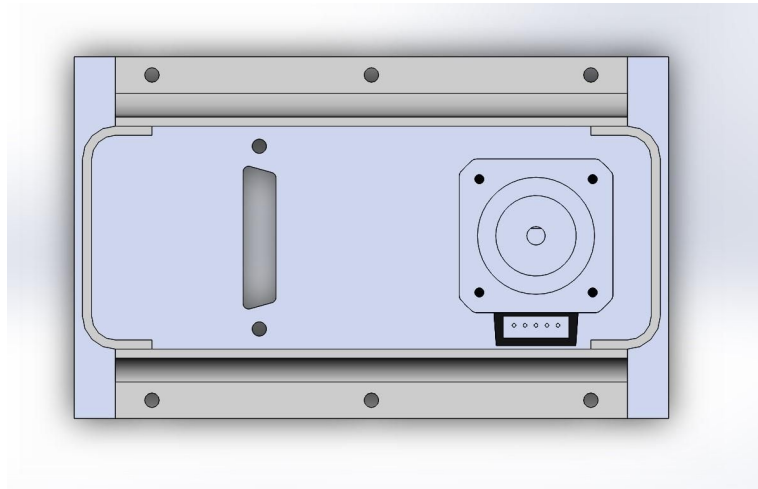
Yaw motor housing with Dsub 25 slot shown. This will be used to connect a cable to the electronics box.
